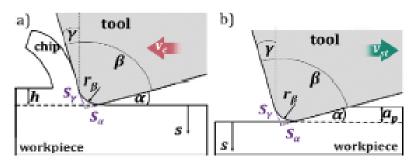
Contact conditions for Complementary Machining: a) conventional machining, and b) complementary machining [13].
